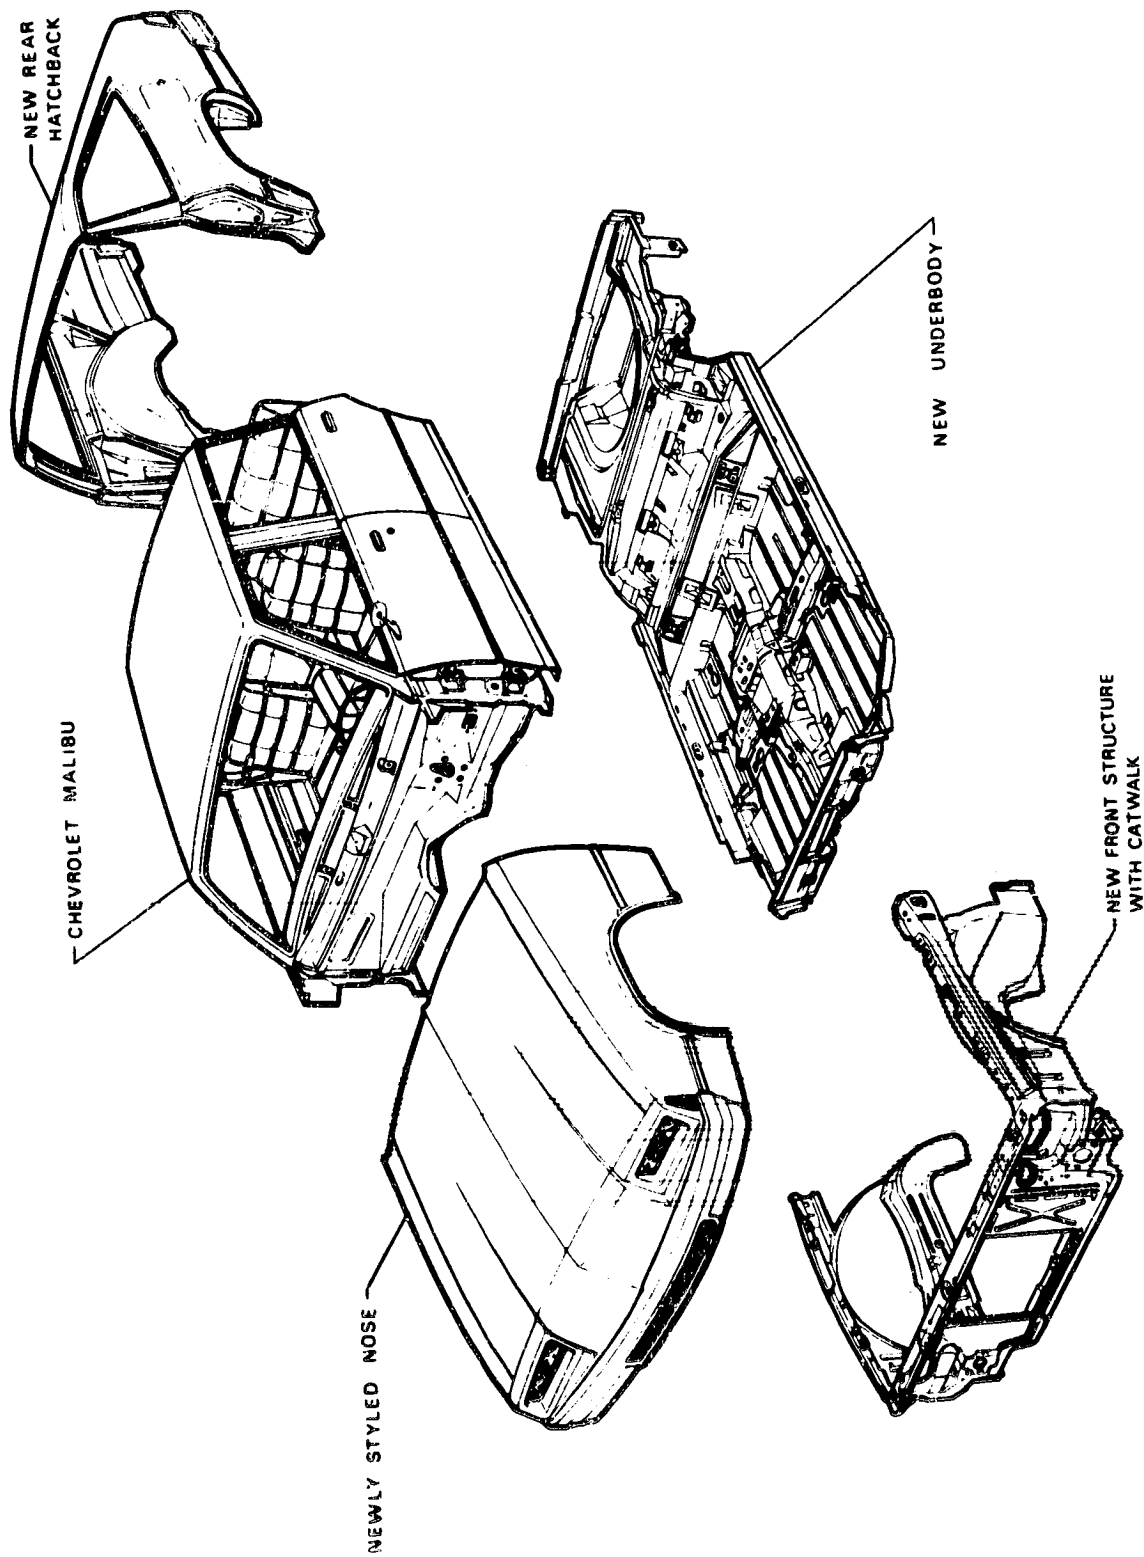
Hybrid Vehicle Body Structure, Exploded View
